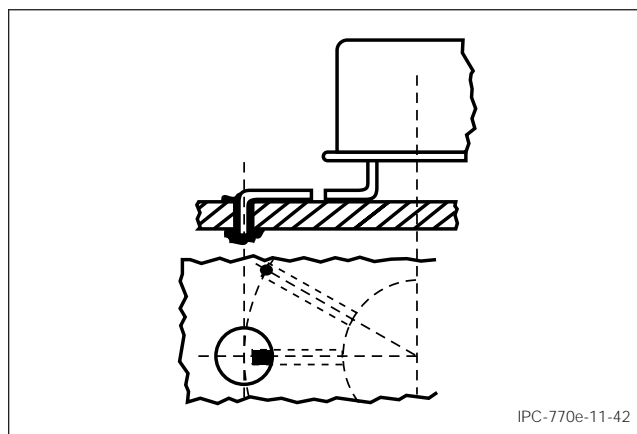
Radial Components Mounting (Unsupported Holes)
